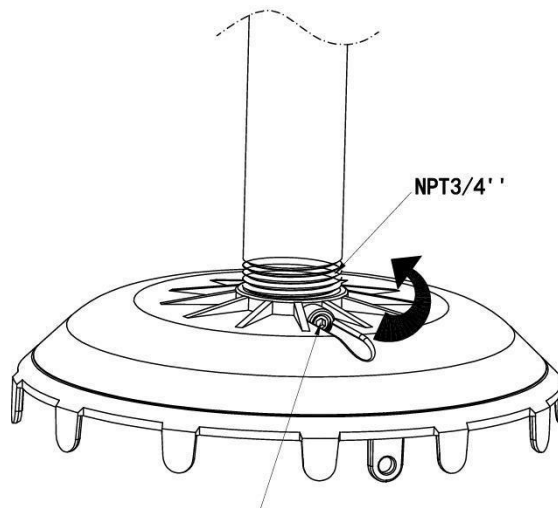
Pendant mount, step 2: securing the detector to the pendant.
